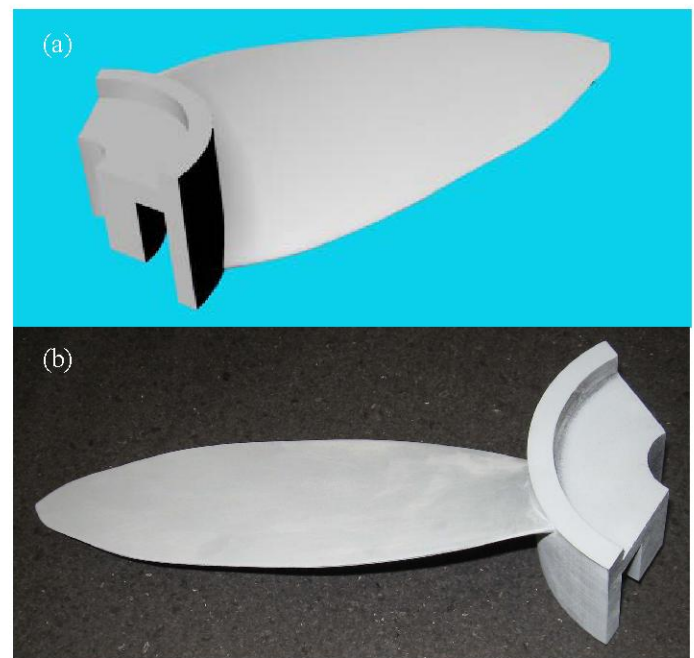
Propeller design in CAD (a) and the 3D printed result (b).
